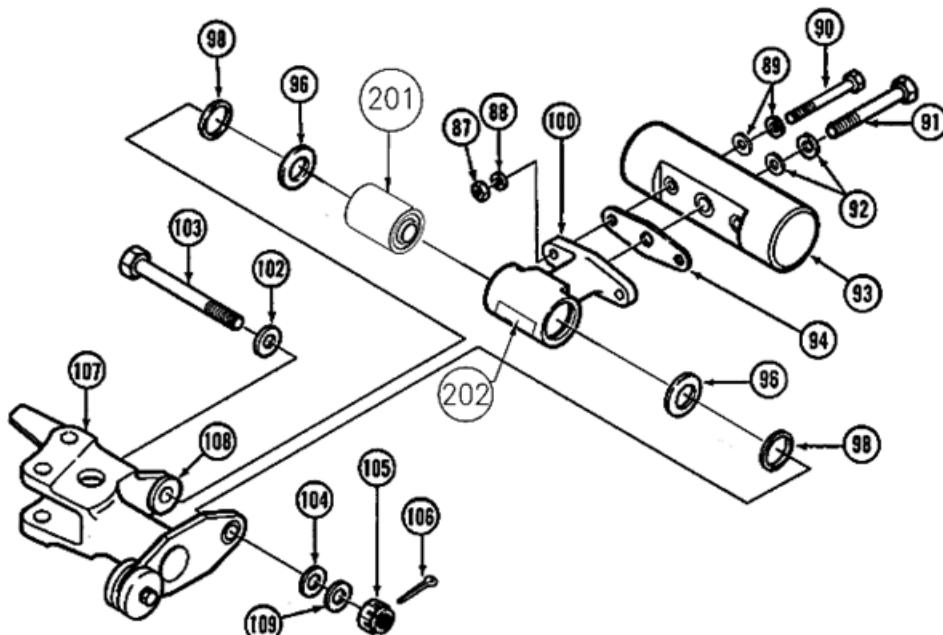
Arm & Bearing Assembly (Exploded View)
